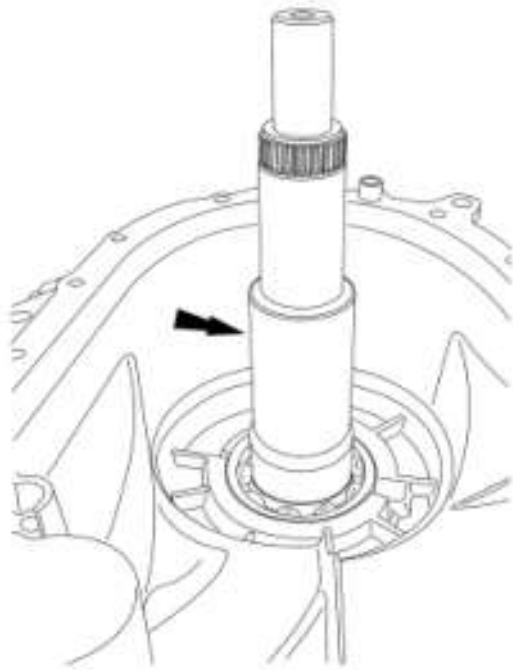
Installing Bearing Using Special Tools (205-153, 204-020)
